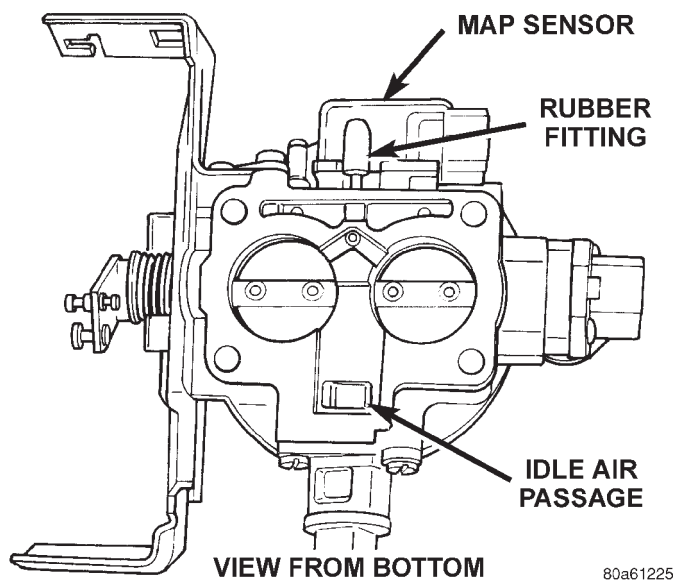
Rubber L-Shaped Fitting—MAP Sensor-to-Throttle Body
